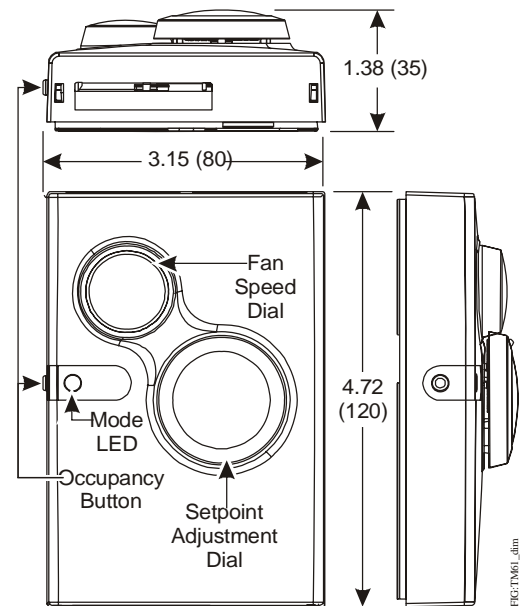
TM-1161-0002 and TM-1161-0007 Dimensions, in. (mm)
